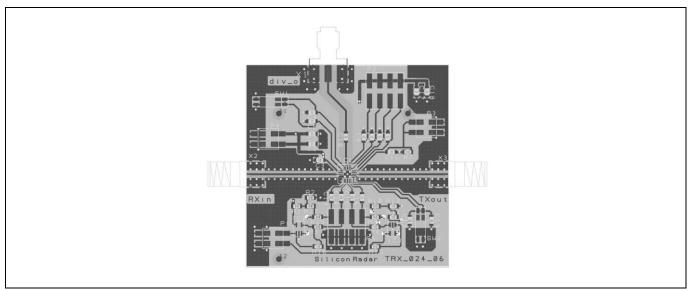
Evaluation Board Layout Including Via Holes (50 mm × 50 mm, Top View)
